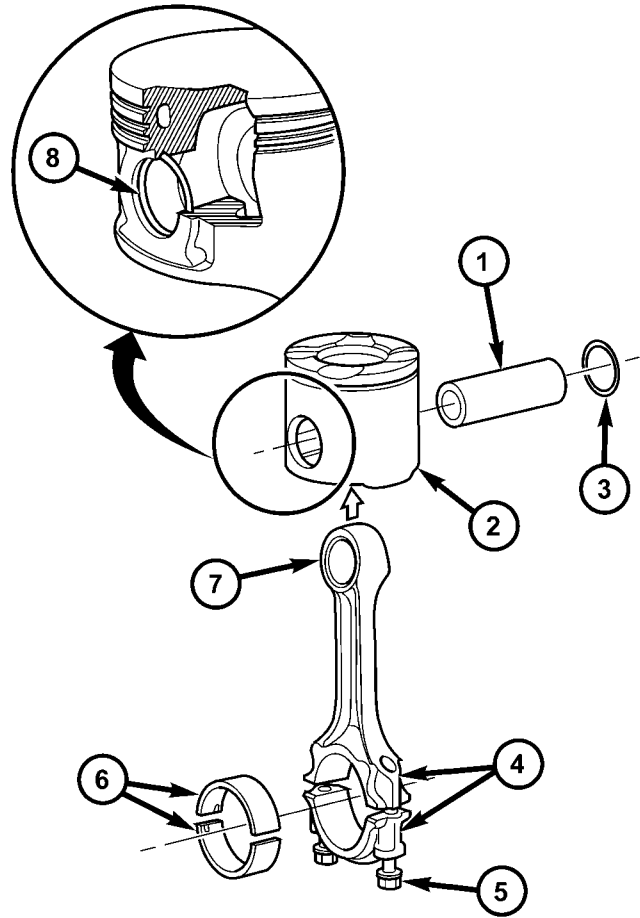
PISTON AND CONNECTING ROD ASSEMBLY
